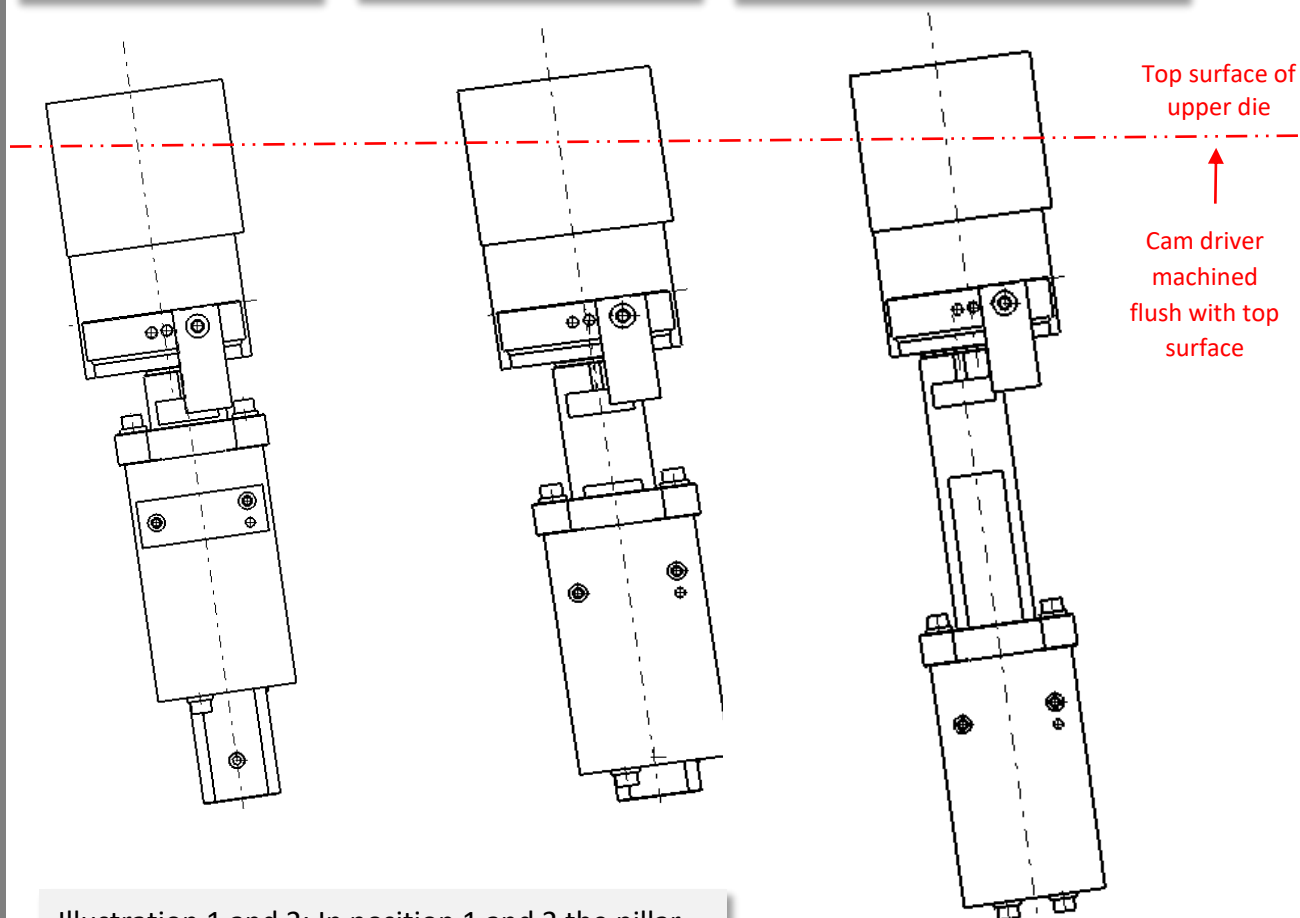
and 2: In position 1 and 2 the pillar can be tightened to the cam driver by a socket head screw and the whole unit can be lifted out of the die. (Housing stays in the blank holder)
